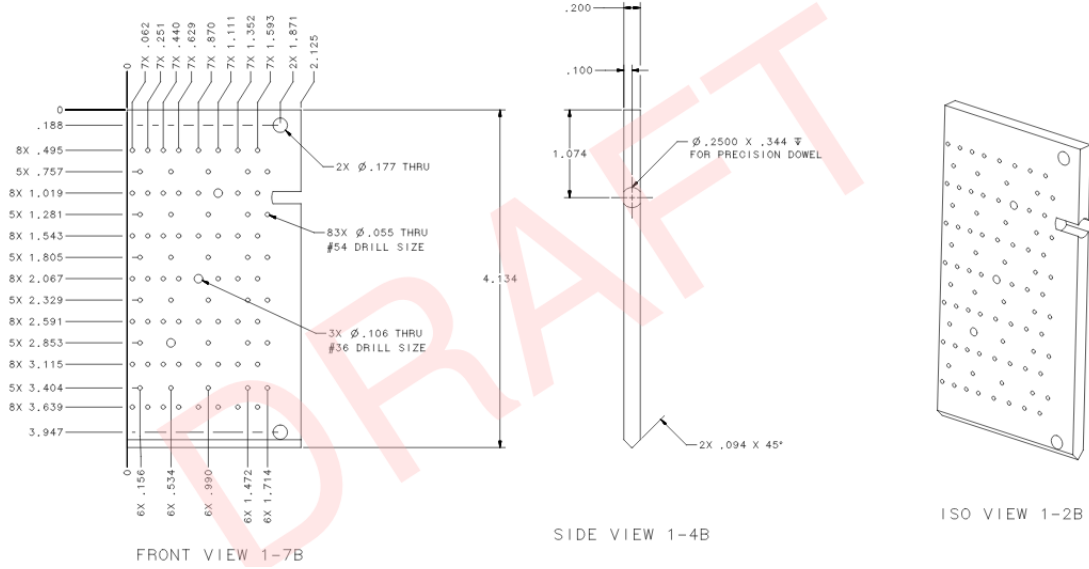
CAD drawing of RHRS Sieve. All dimensions are given in inches. The large sieve holes are used a reference for the tracks
